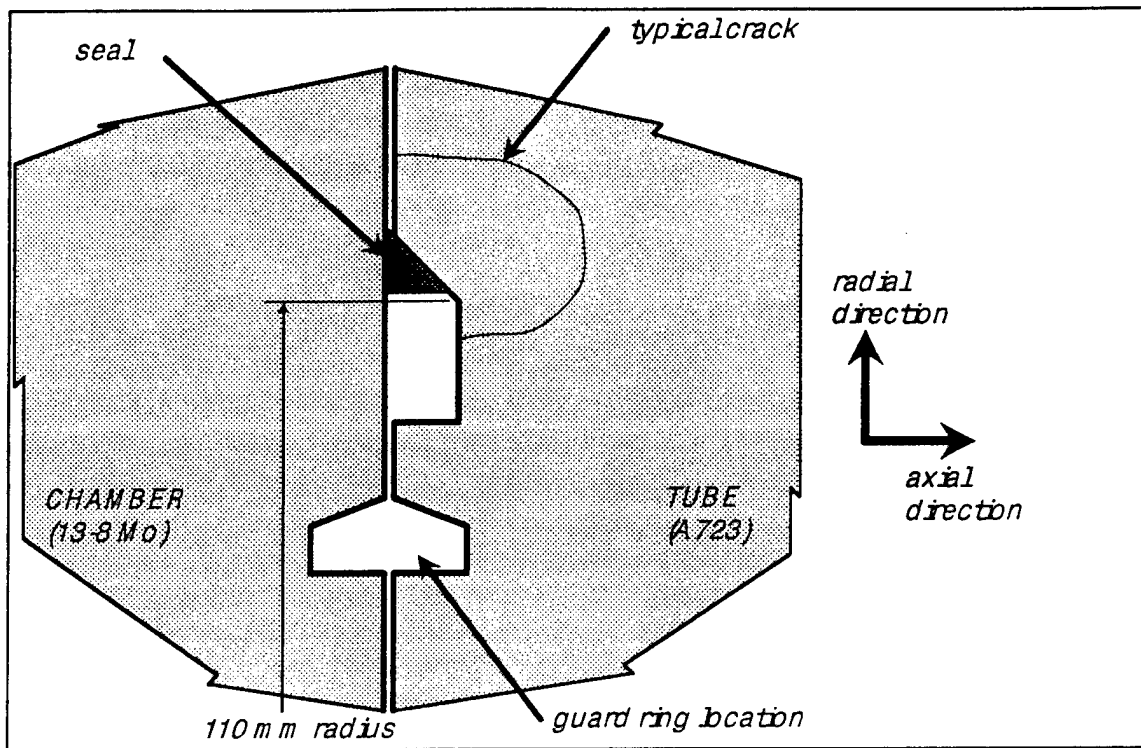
Sketch of Seal Location #1 and Cracking Observed
